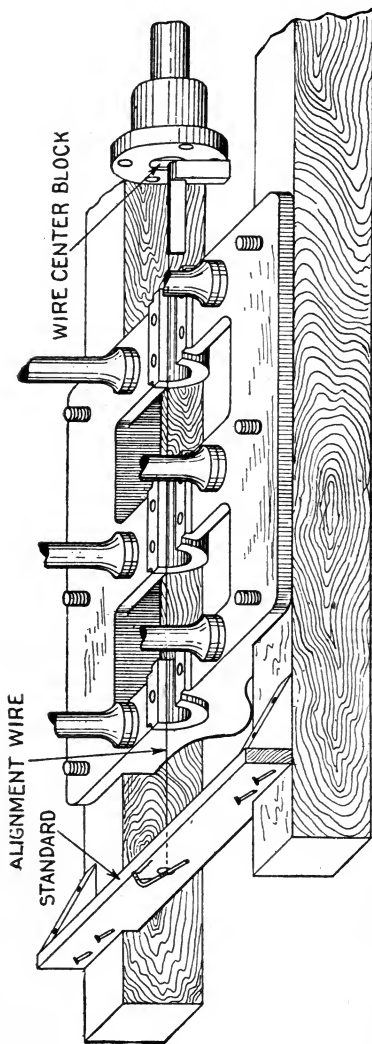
,161.—Method of aligning the bedplate of a marine engine with the propeller shaft. In the case of a new vessel the engine may be approximately aligned before launching. This should be done before the propeller shaft is put in position. The alignment wire is stretched from the standard in front of the bed plate through the stern tube. The final adjustments should be made after the vessel is in the water, in the manner shown above, because especially in the case of light boats, the hull changes its shape more or less with the redistribution of supporting pressure.
